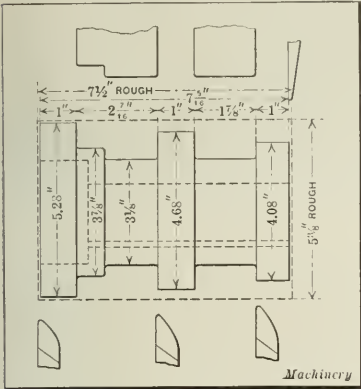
Tool Diagram for turning and forming Cluster Gear
